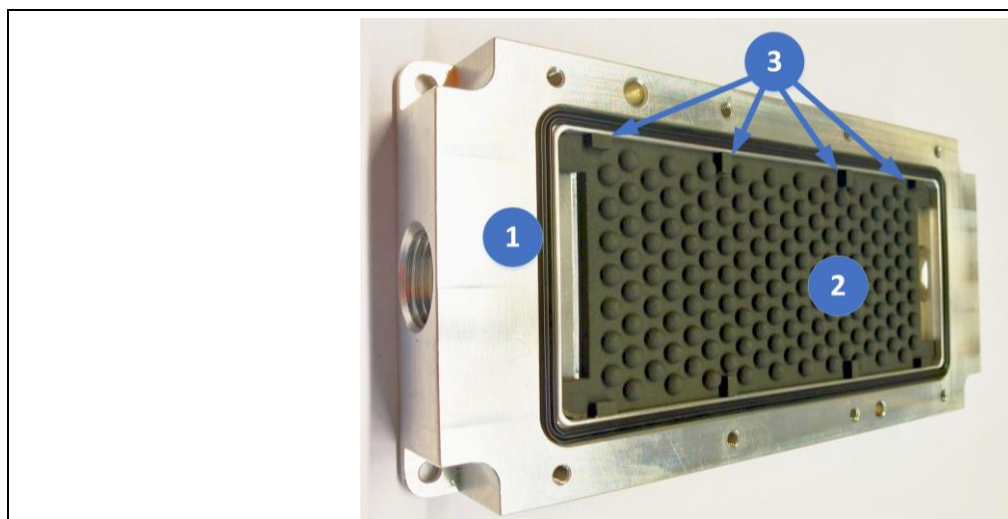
For rapid prototypes it is possible to use a 3D printed plastic inlay in the standard PinFin cooler. (1) shows standard cooler and standard sealing ring for PinFin. (2) show the 3D printed plastic inlay. (3) highlight the distance keeper at the edge of the inlet to ensure stable position in the cooler during testing.
